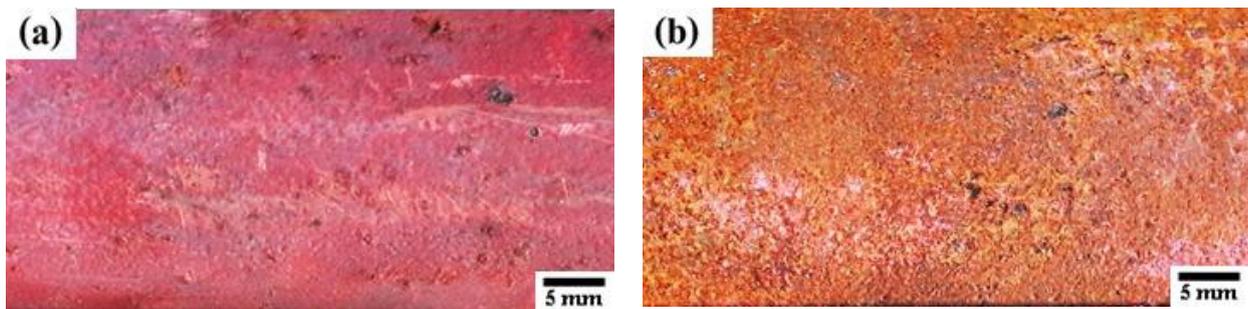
Outer surface conditions (a) the unused tube; (b) used tube
